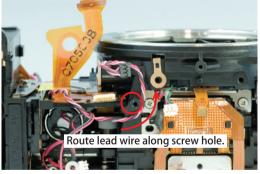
Routing of Lead Wire on Bottom PCB Ass'y (2)
